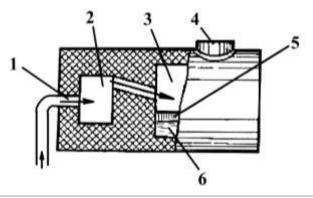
Tilting reverberatory furnace: 1 - yet; 2 - combustion chamber; 3 - melting chamber; 4 - tapping throat; 5 - slag; 6 - metal
